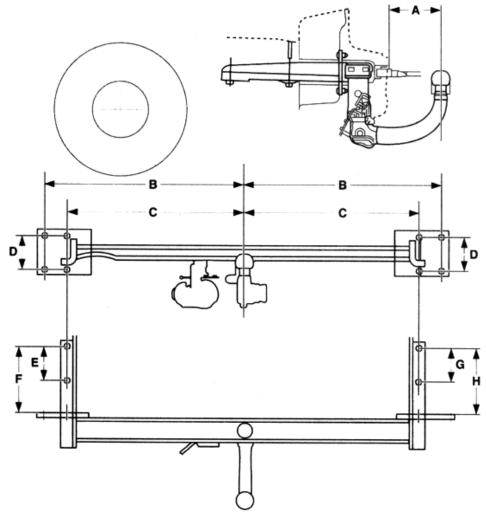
Installation size Pull - coupling device with removable ball support «Caravan»
